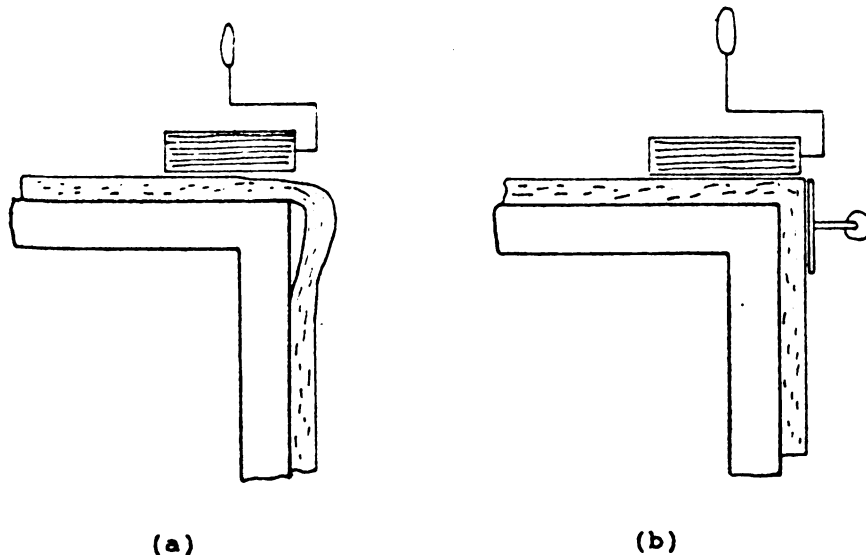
Moulding Technique for External Corners (Reference 14).
